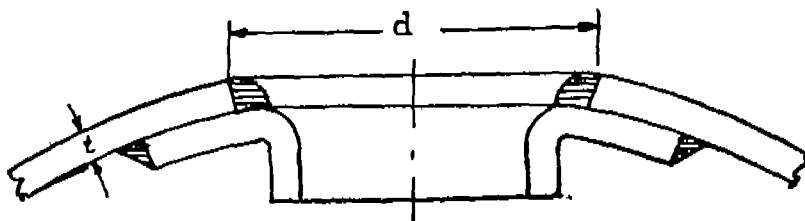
ELLIPTICAL MANHOLE FRAME WELDED TO DISHED END PLATE
